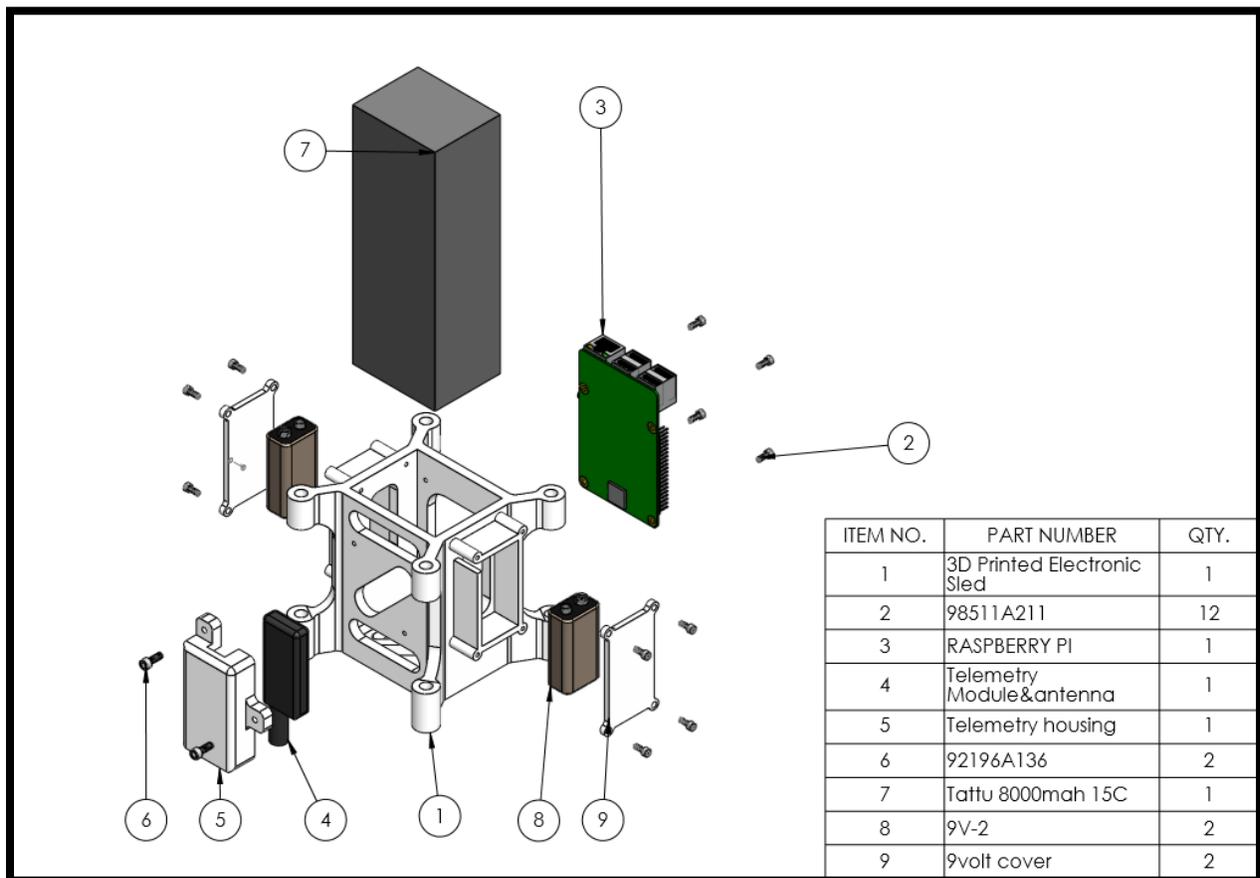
Detailed drawing of the 3D Printed Batter Sled.
